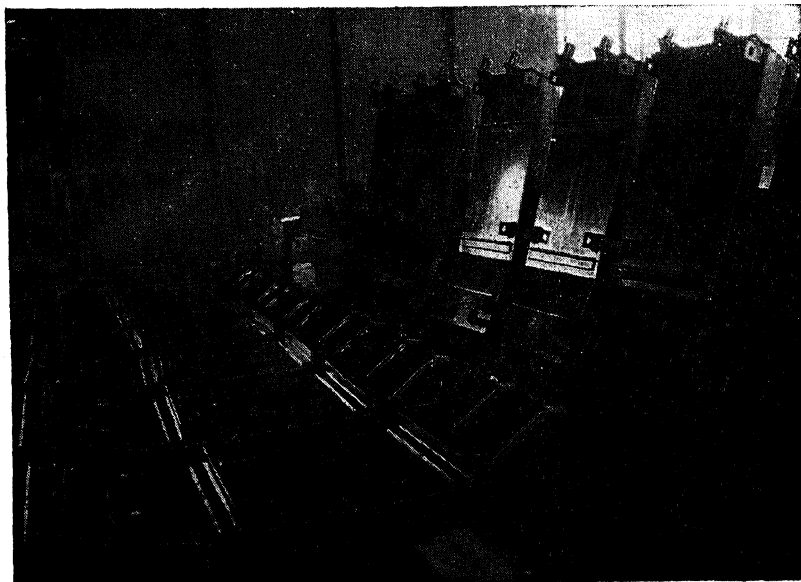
Blast furnace side jackets fabricated by arc welding.
